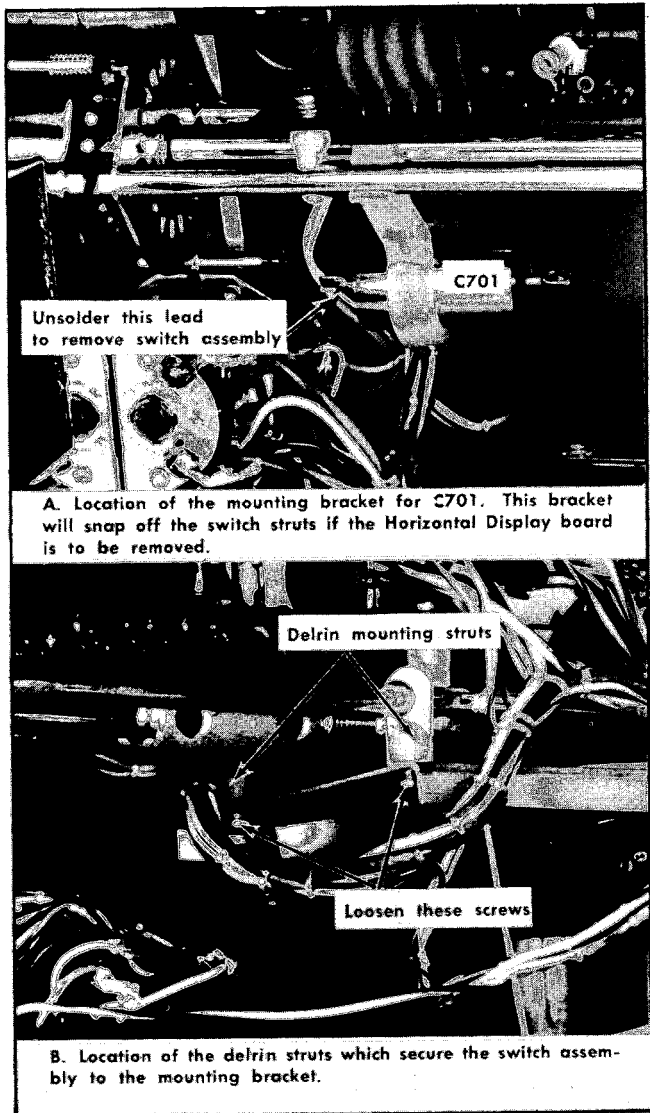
Removing the TIME/DIV switch. Local oscillator assembly removed to show the location of the mounting hardware.
